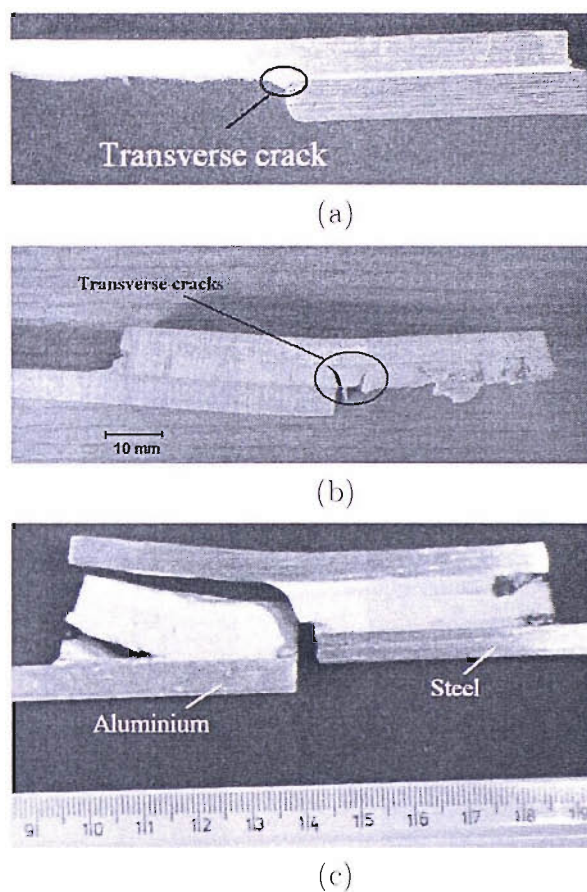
Transverse crack in the adhesive layer of butt strap joints and permanent deformation of the strap: (a) 1 mm. (b) 3 mm. (c) 10 mm
